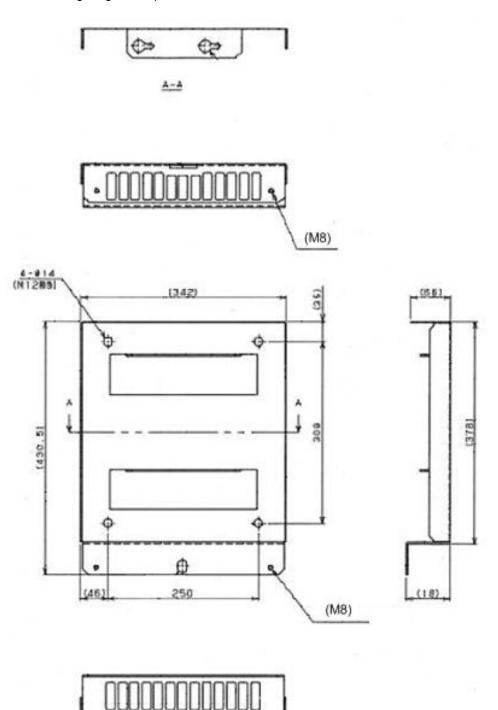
Wall Mounted MacroMAXe Wall Plate Details
